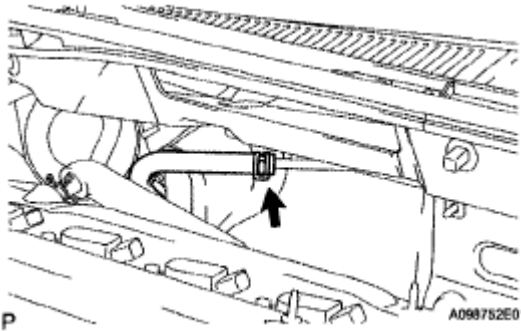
Locating Connector Tube Hose From Booster Vacuum Tube
